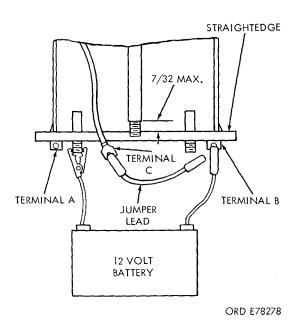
Checking solenoid relay plunger shaft adjustment.
